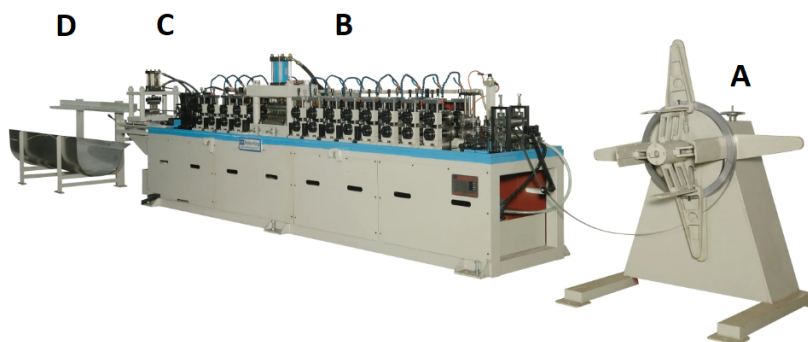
Example of a roll forming machine; A: decoiler feeding a coil of sheet metal to the roll forming machine, B: roll forming line where the metal forming will take place, C: cutting station where the parts are separated from the coil, D: station where the parts are collected [Roller King Enterprise Co., 2020].
